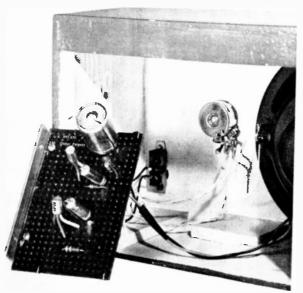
Layout and wiring of the components mounted on the Veroboard
